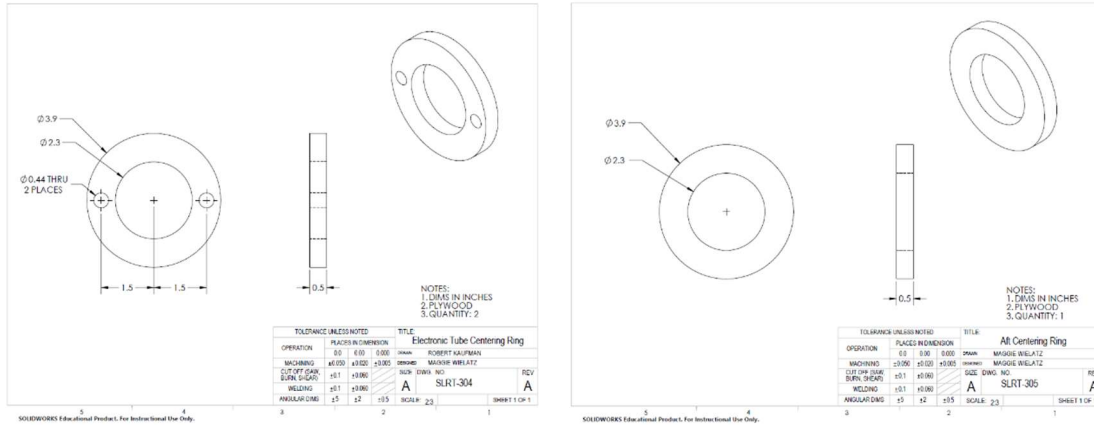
Forward Centering Rings (left) and Aft Centering Ring (right) Drawings
